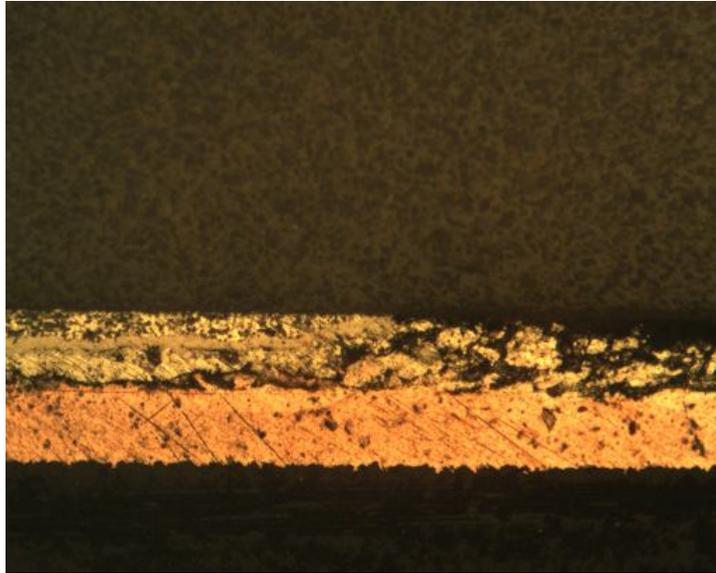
Solder Extrusion into Void under a 2512 Resistor, 1200 Cycles
